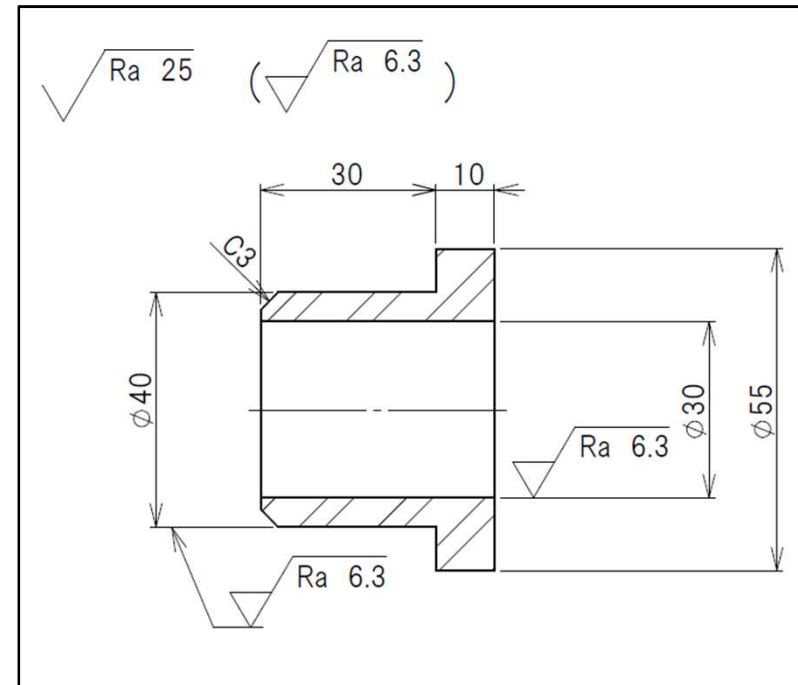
Simple indication of a part of which most of the surfaces in the drawing have the same surface texture.
